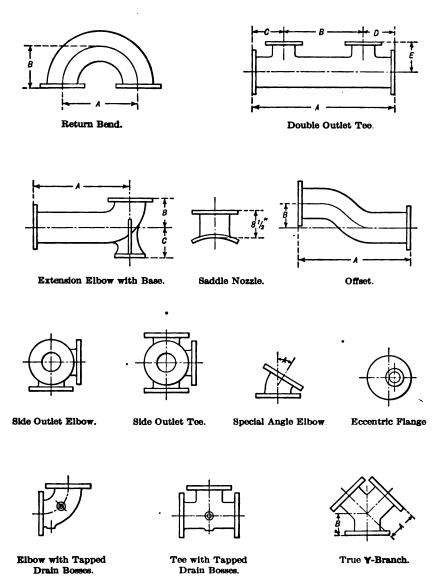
STANDARD CAST-IRON FLANGED FITTINGS.
